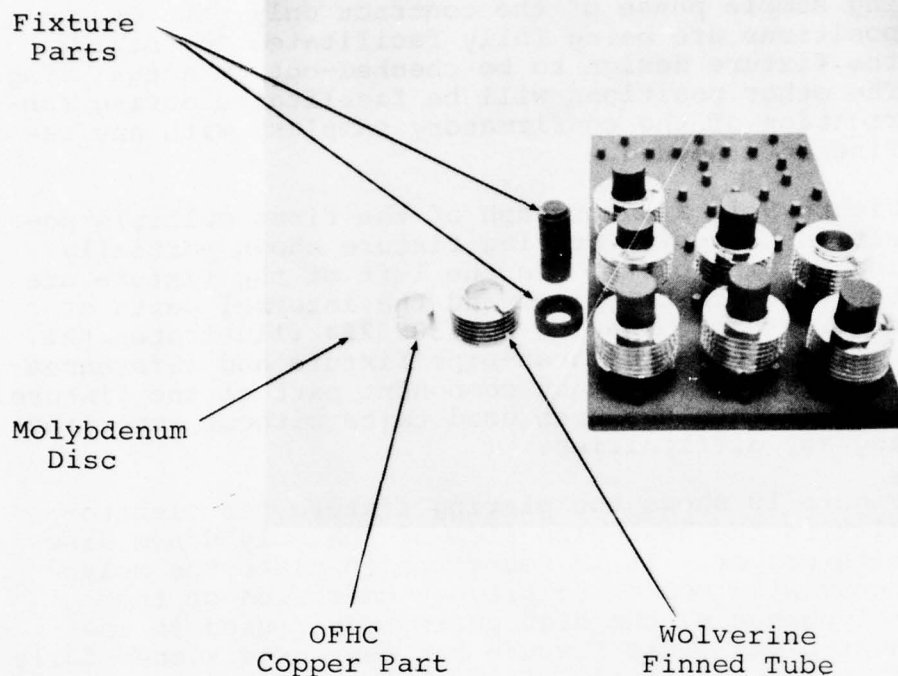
Fixture for brazing the molybdenum disc in the end of the anode heat-pipe and the Wolverine finned tube to the OFHC copper part. This fixture is used to start assembling both the anode and cathode heat-pipes and will be expanded to make 16 brazes simultaneously. Device and fixture parts are shown on the left side of the photograph, prior to assembly.
